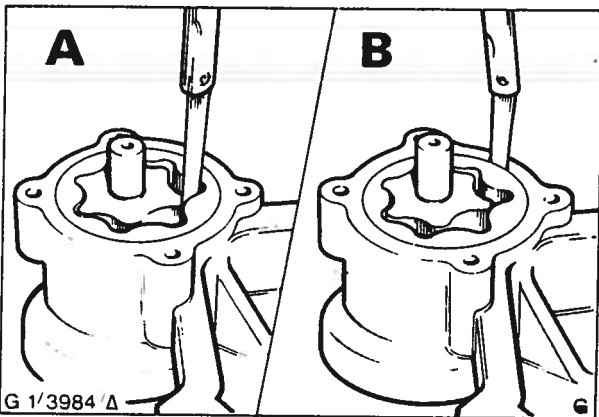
Measuring Rotor Lobe/Body Clearance
